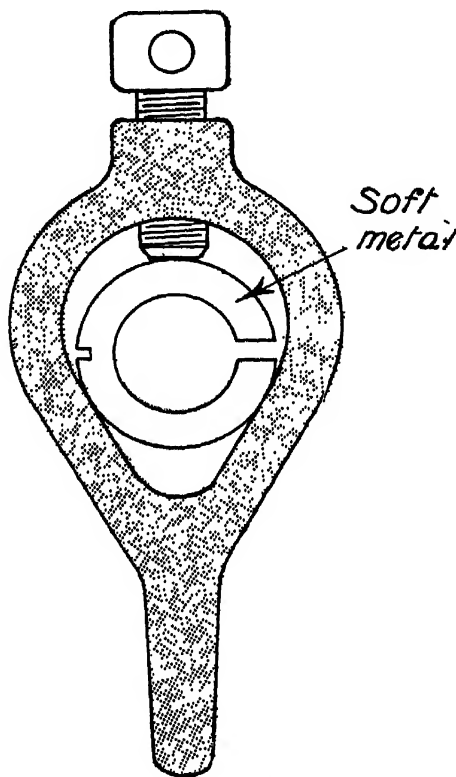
SPLIT RING PLACED IN CARRIER FOR LAPPING PURPOSES
